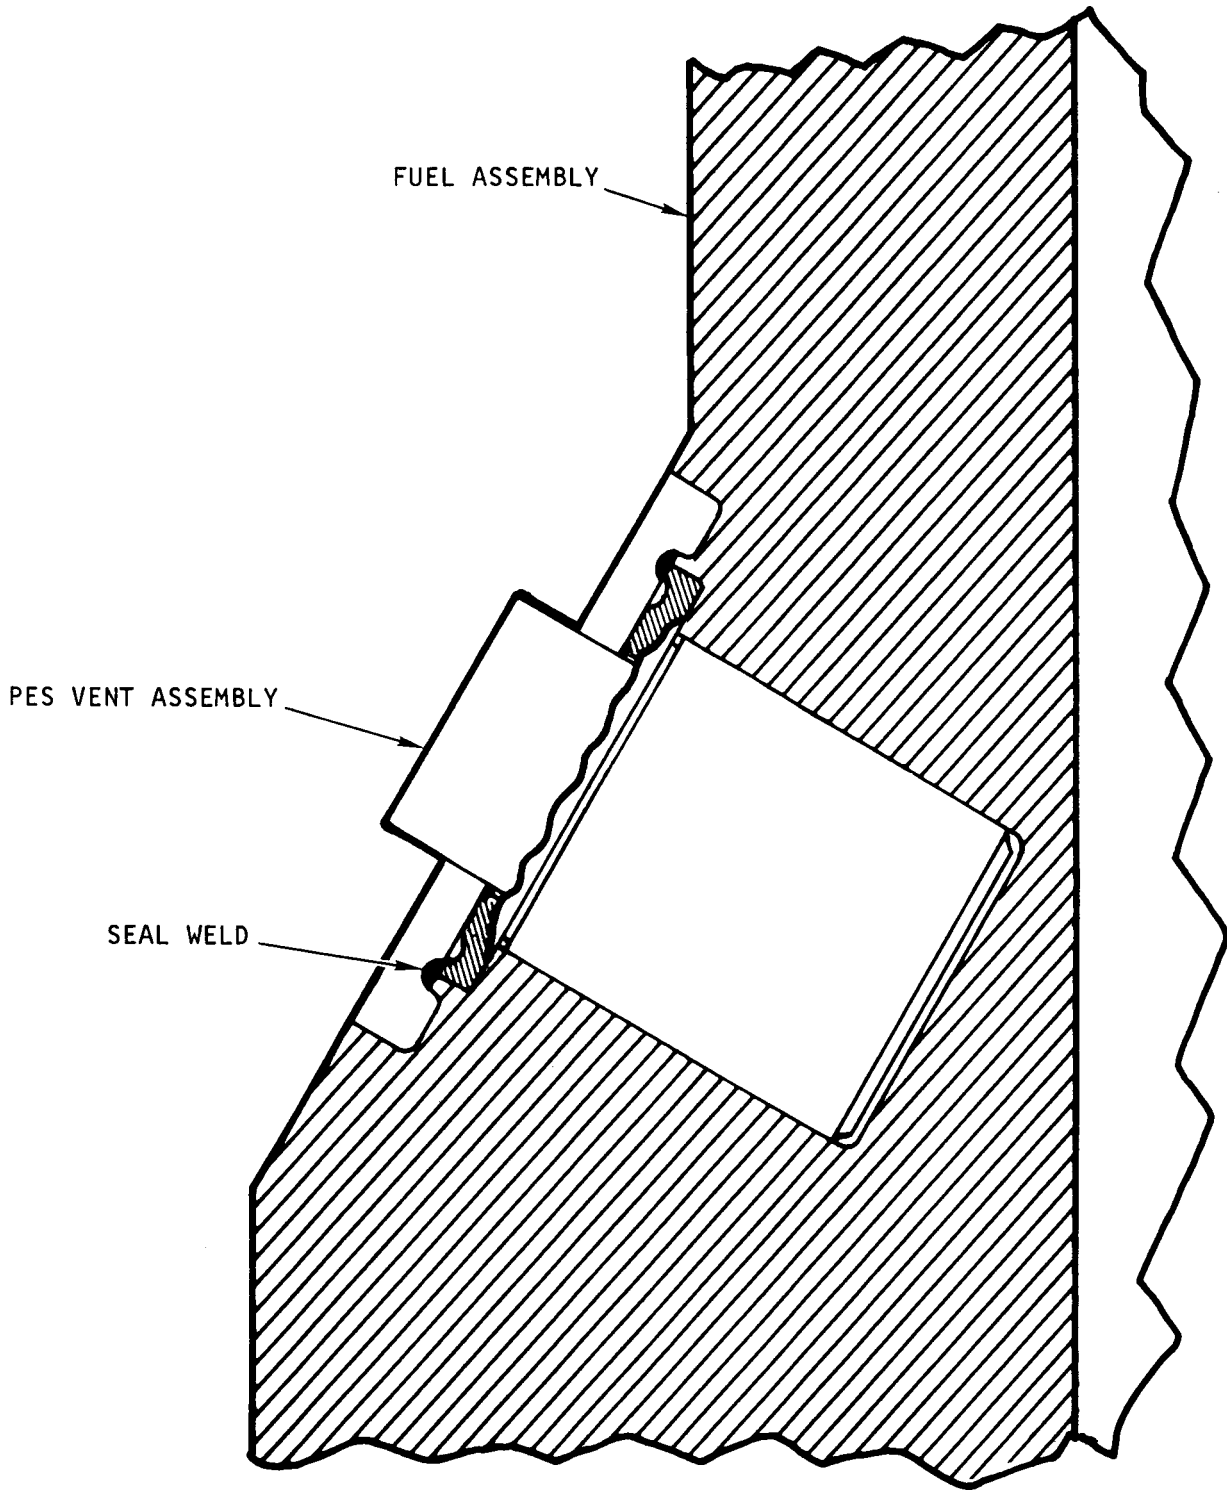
PES vent assembly installation perpendicular to conical surface
